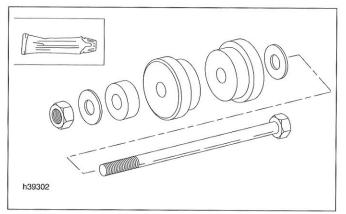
Steering Head Bearing Race Installer (HD-39302)
